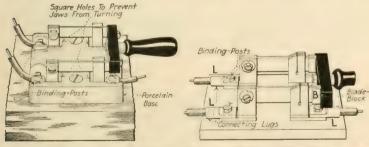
Showing the method of preventing switch jaws from being turned on the base by fitting them into countersunk square holes.
